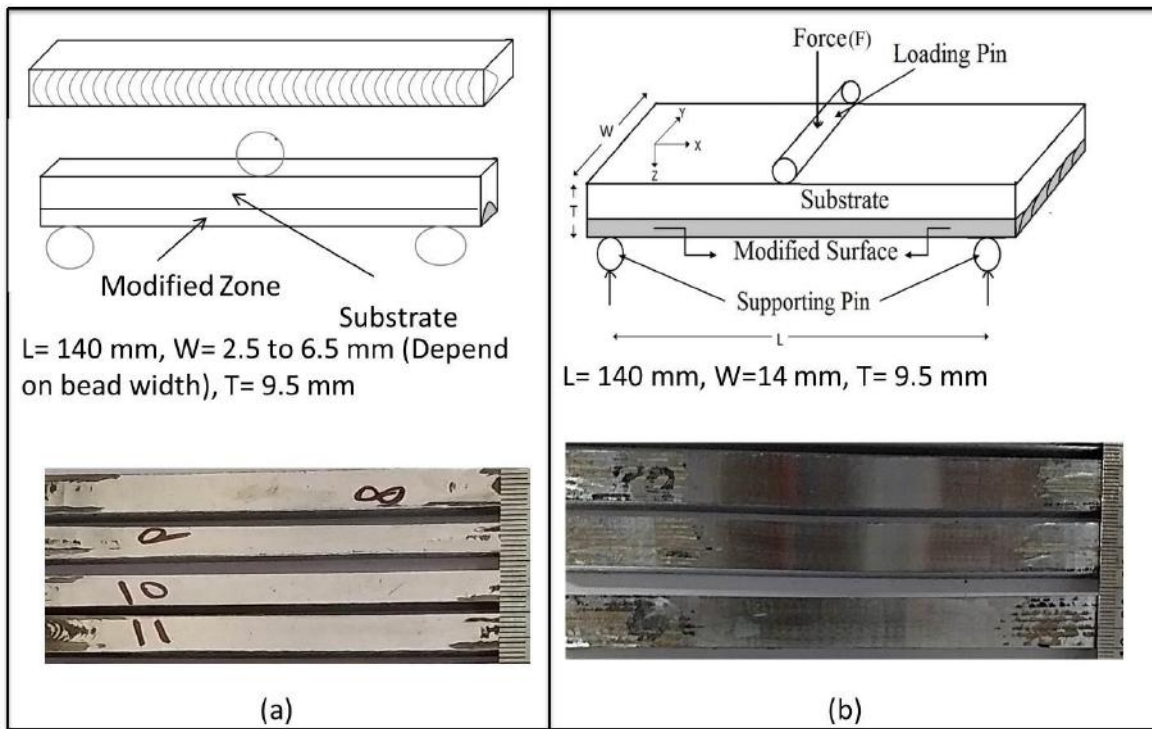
Schematic view and typical appearance of three point bend test sample for a) Single-pass surface modification b) multi-pass surface modification.
